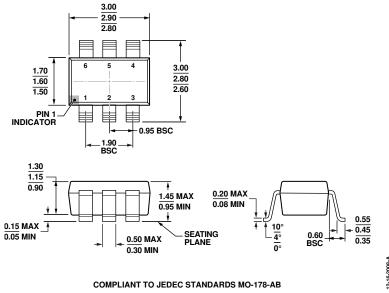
6-Lead Small Outline Transistor Package [SOT-23] (RJ-6) Dimensions shown in millimeters
